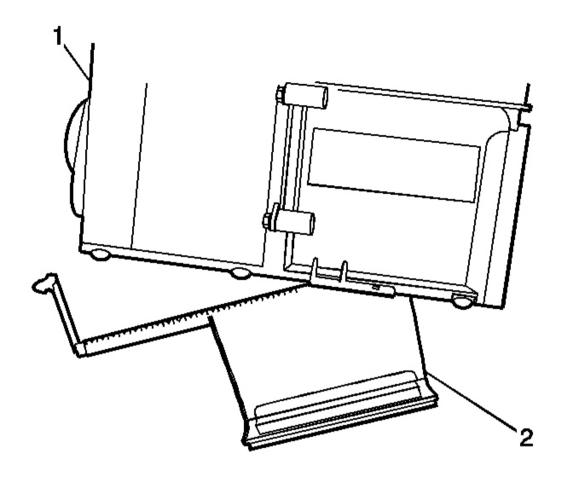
Lower Mode Door & Air Distribution Housing Courtesy of GENERAL MOTORS CORP.
